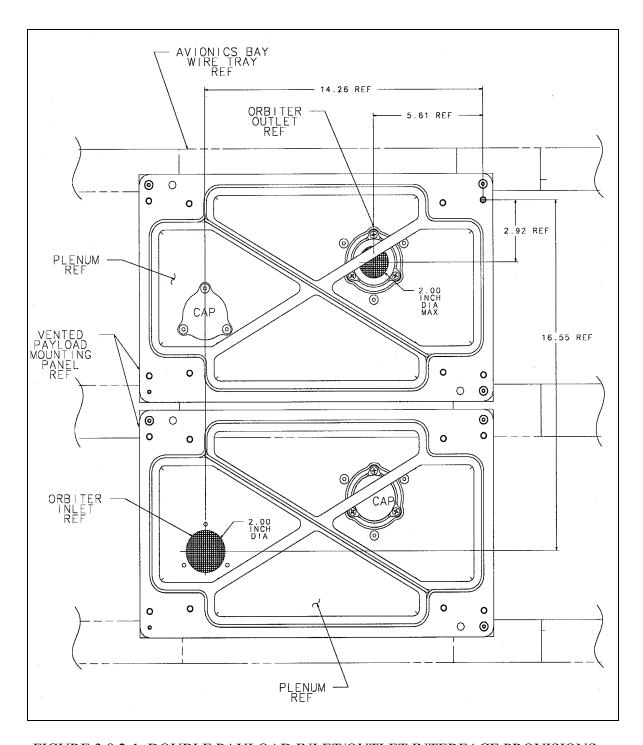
DOUBLE PAYLOAD INLET/OUTLET INTERFACE PROVISIONS (TOP HALF OF OUTLET/BOTTOM HALF OF INLET (MINIMUM 0.75 INCH RECIRCULATION GAP)
